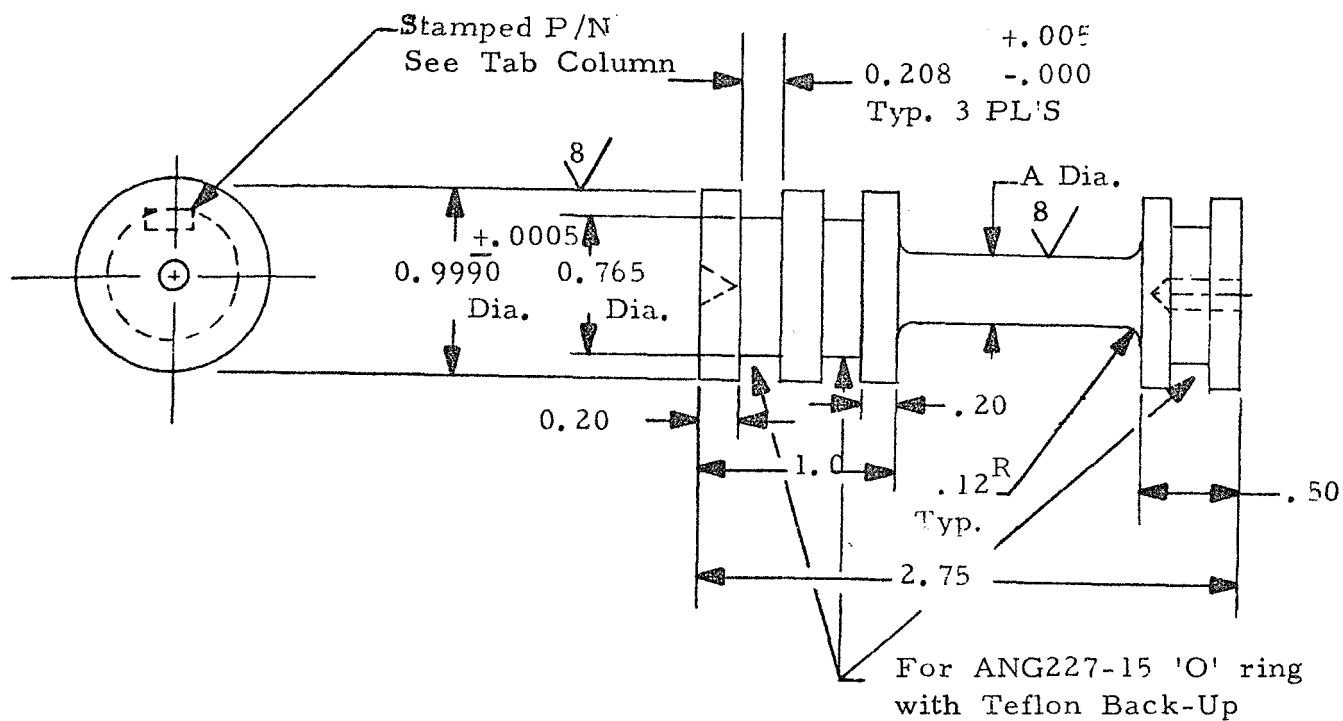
Pressurized Cylinder Specimen Dimensions
